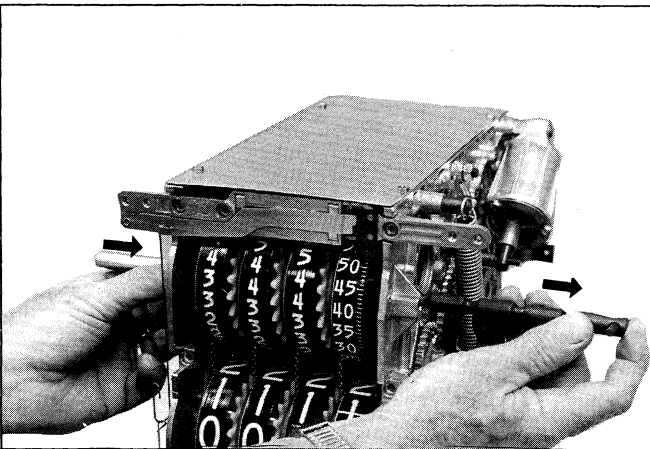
Pushing wheel shaft out of computer with long dummy shaft.
